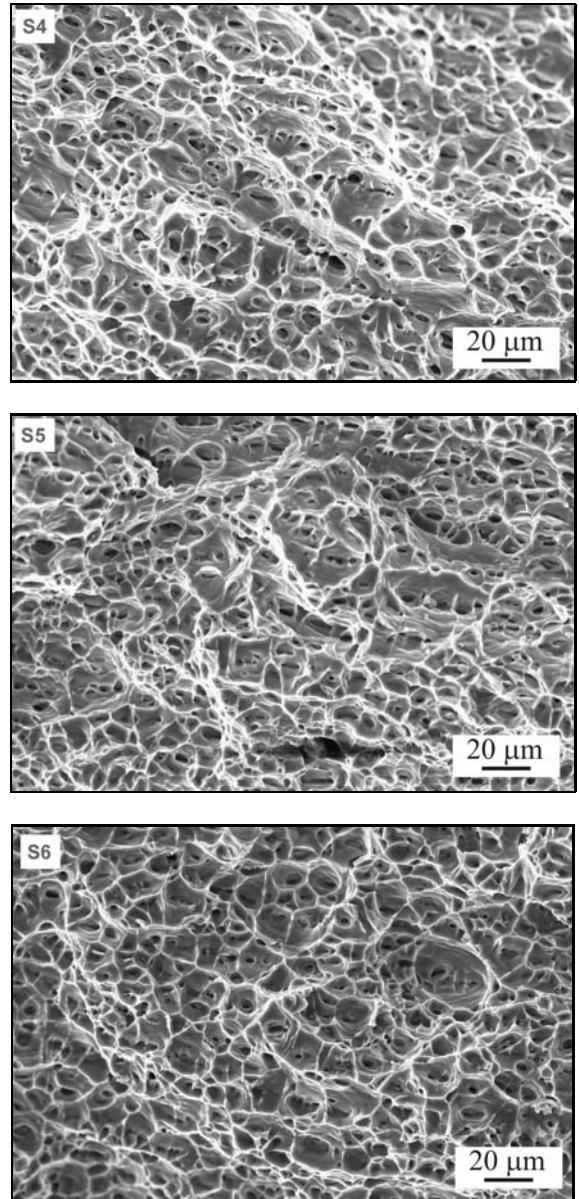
SEM fractograph of the samples welded at 1400 rpm using triangular tool pin.
